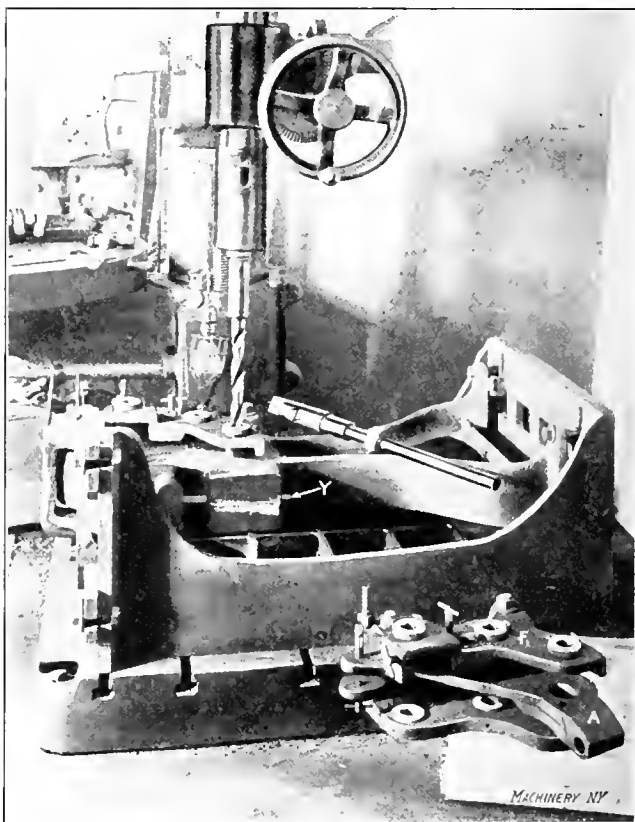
Drilling, Reaming and Counterboring the Bearings for the Gears
